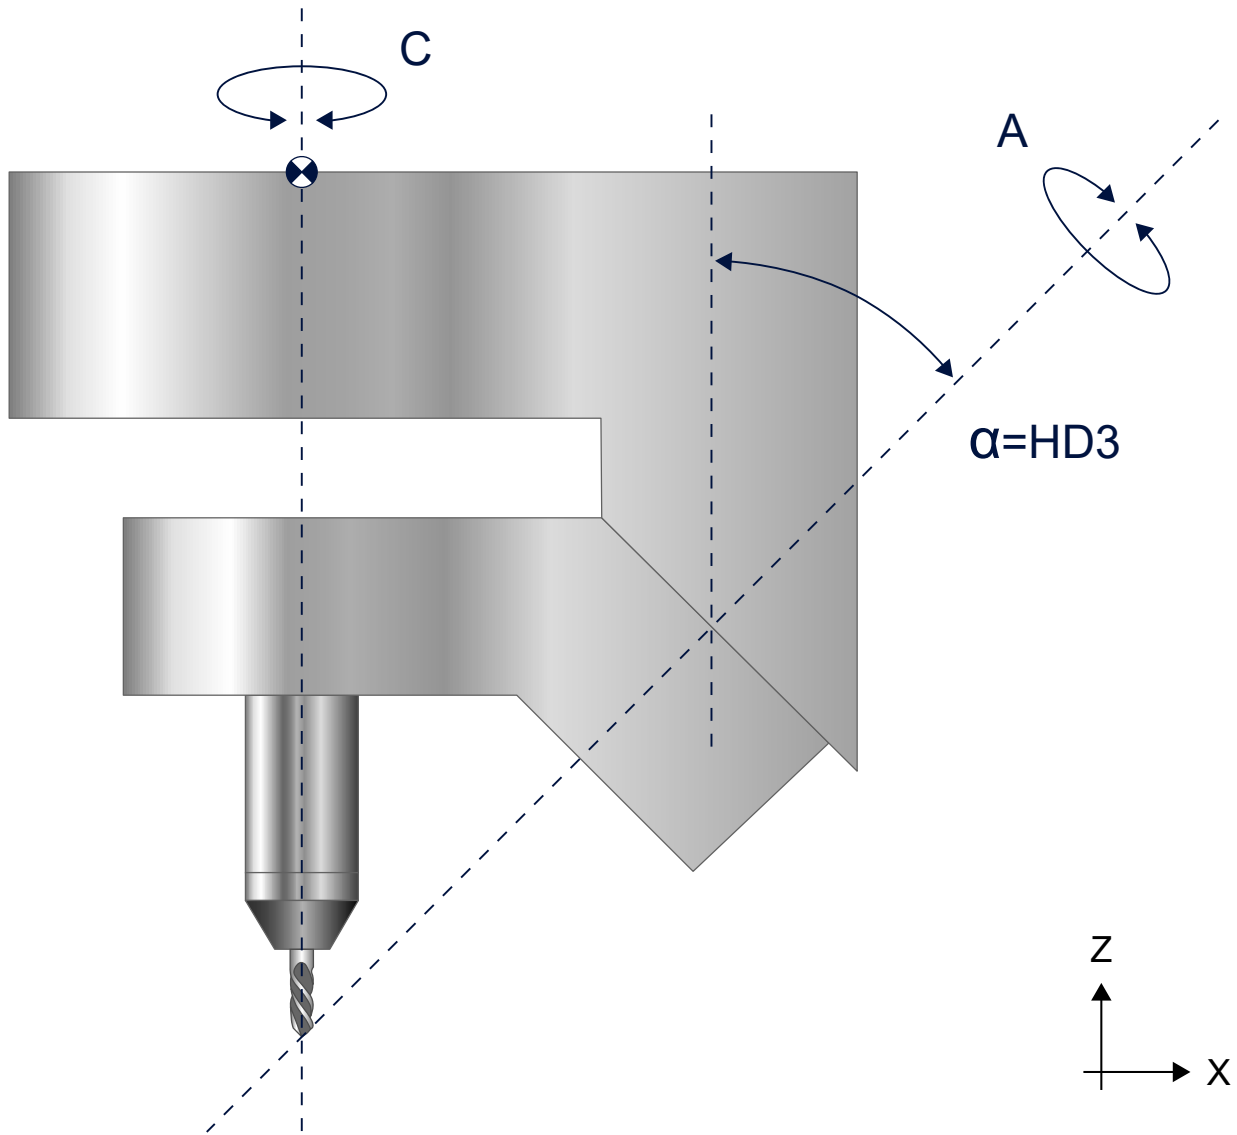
Oblique tool head with 180 degree head offset in zero position, HD7=1
